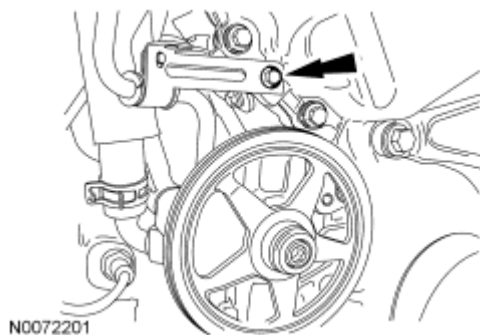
Identifying Bracket-To-Power Steering Pump Bolt
